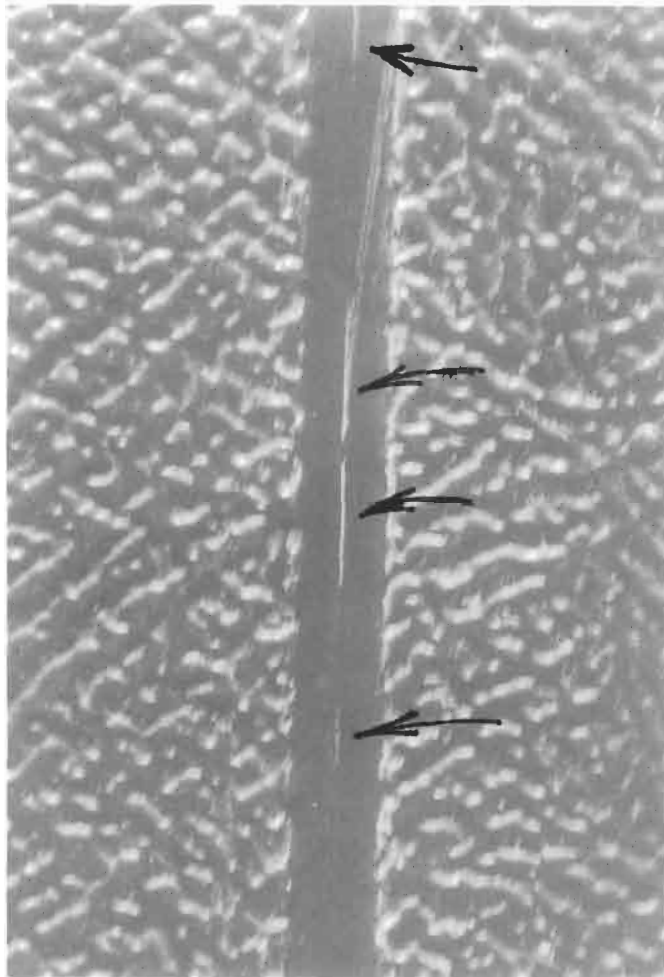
Close-up of hairline subcritical cracks (arrows) in another vertical weld of the failed tank. The weld was adjacent to that which failed, occurring about the same height, towards the centre of the panel. The cracks were found during re-inspection of the tank, by dusting the welds with fine talcum powder, and represent sub-critical cracks formed during loading the tank with caustic soda. The weld itself is about 2.5 mm wide.
